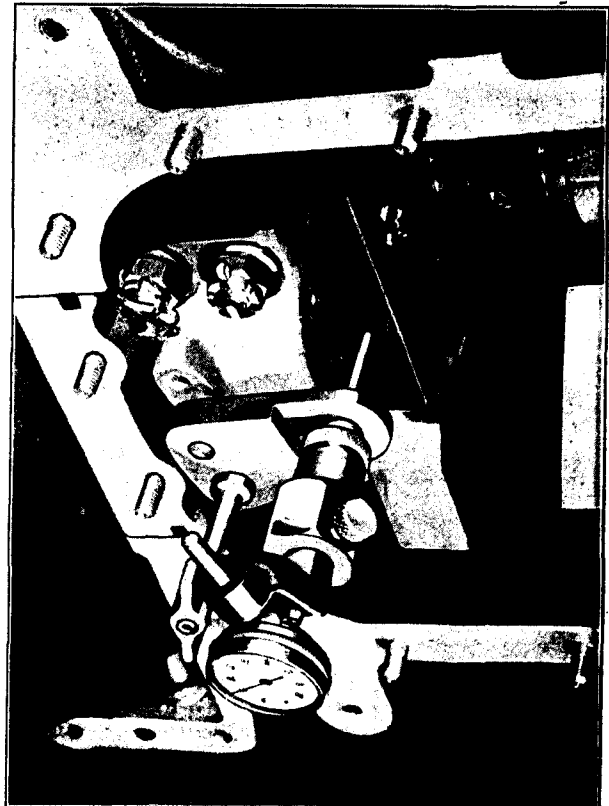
Indicating Rear Main Bearing. Indicator 196-B and Holder 65530 with Adapters A and C
